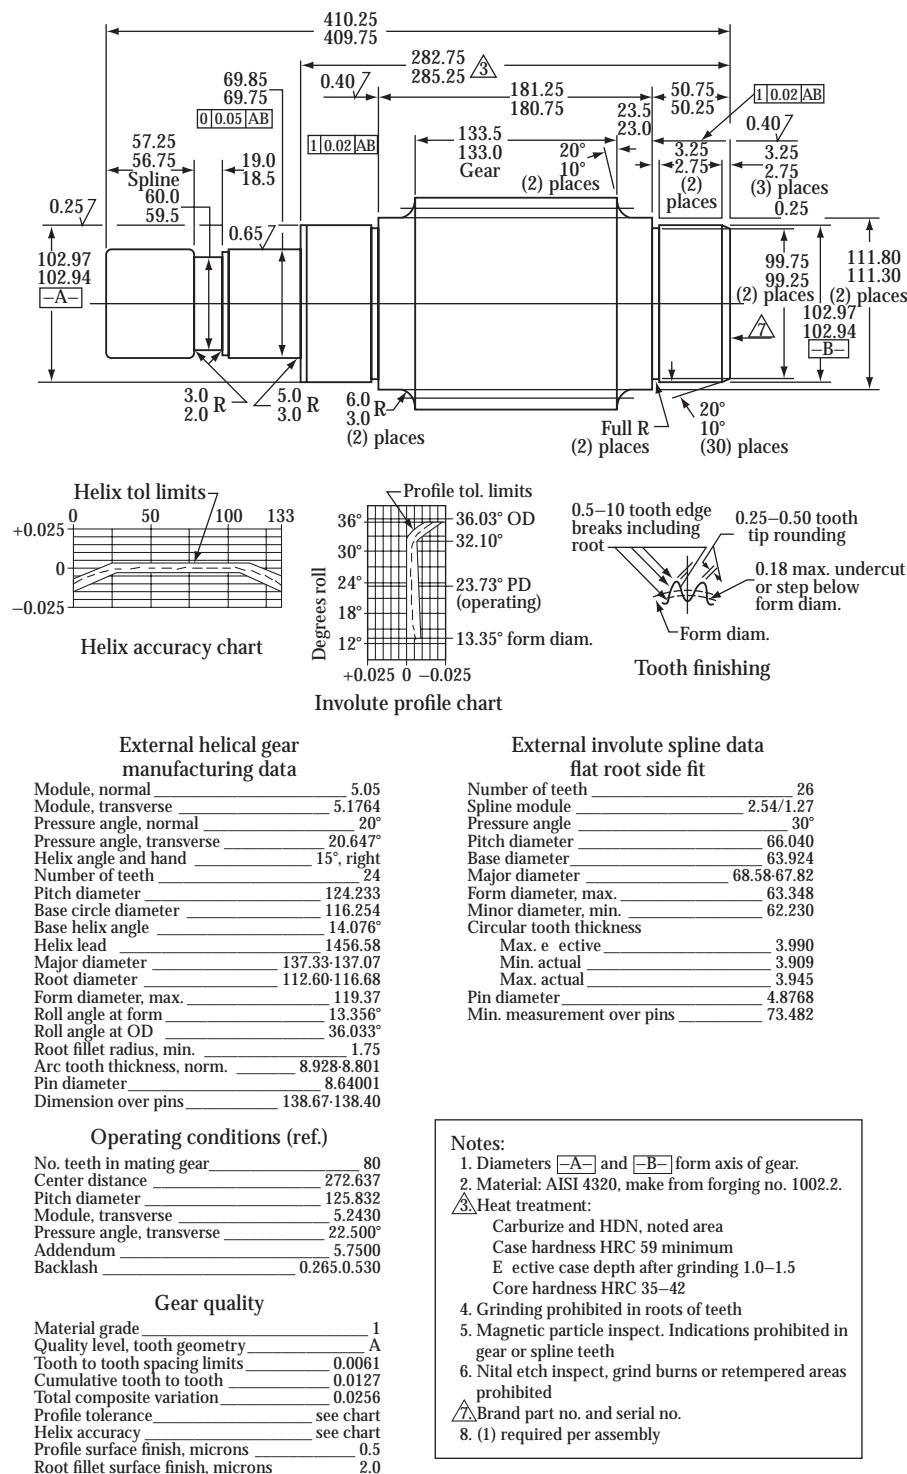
Sample gear drawing for high-precision turbine gear work.
